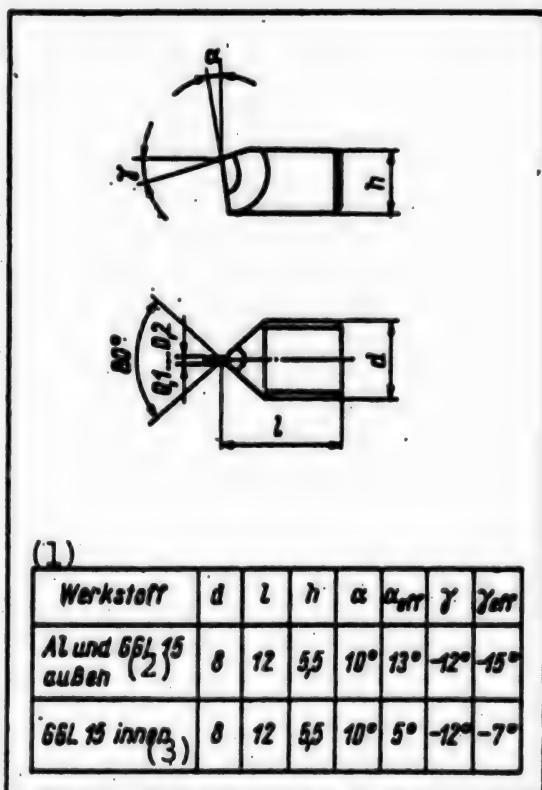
Cutting-edge Geometry of the Carbonado and Composite Insert
